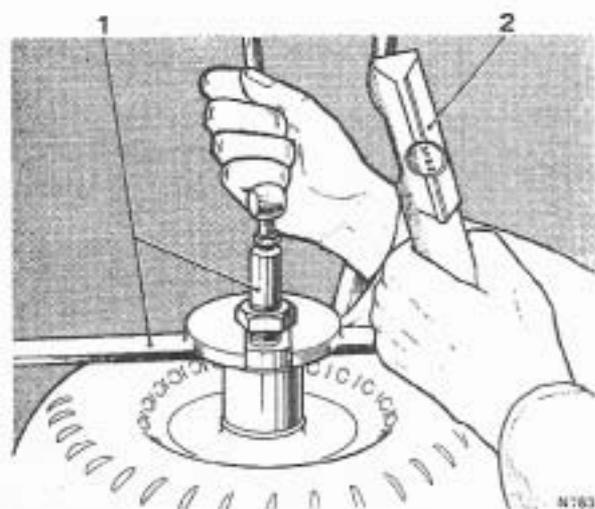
TORQUE CONVERTER—LEAK TESTING FIXTURE
